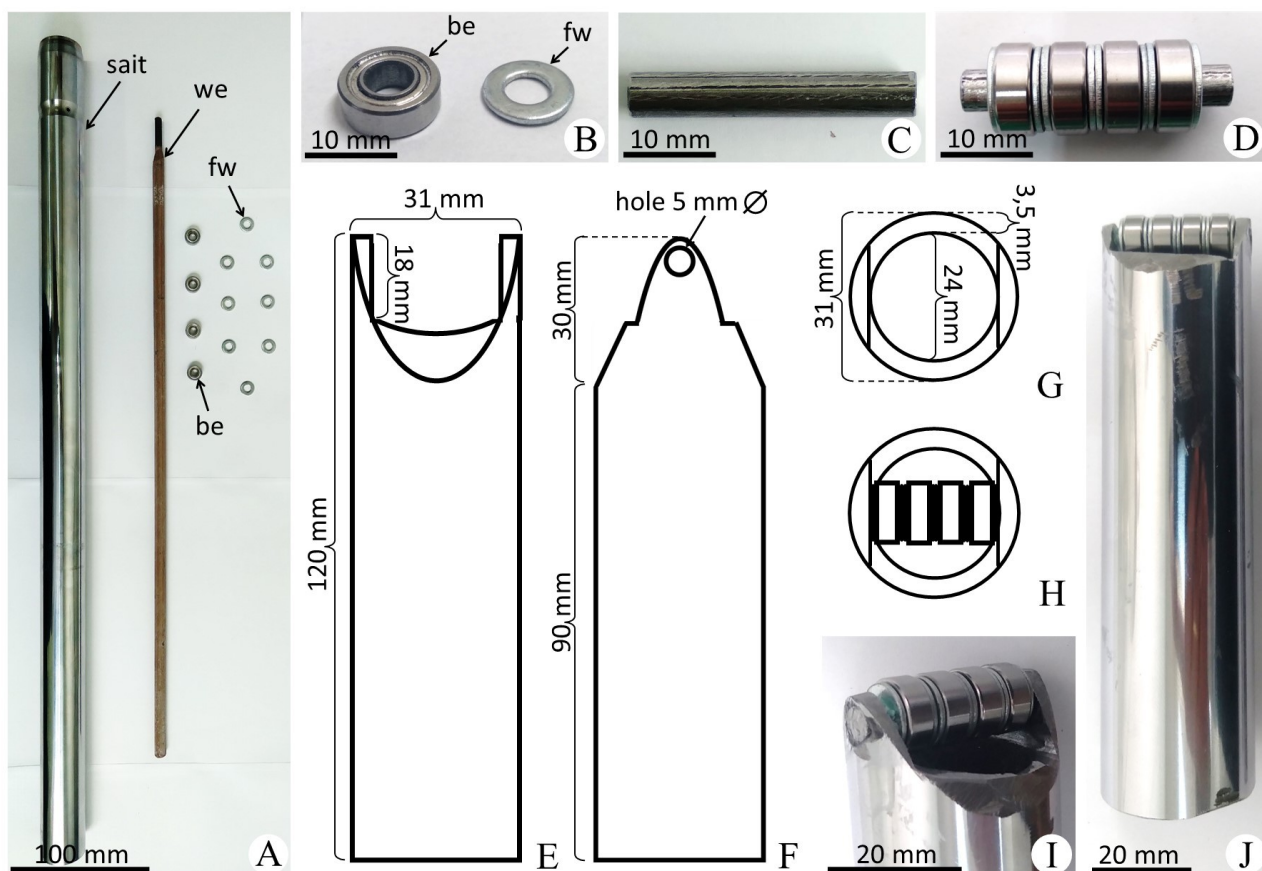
Construction of the macerator. (A) Materials. (B) Bearing and washer. (C) Welding electrode segment. (D) Mini roller. (E) Scheme of the handle made with the shock absorber rod in lateral view. (F) As in (E), but rotated 90°. (G) As in (E), but in top view. (H) As in (G), but with the mini roller installed. (I) Detail of the top of the macerator. (J) Whole macerator. Legends: be- bearing, fw- flat washer, sait- shock absorber inner tube, we- welding electrode.
